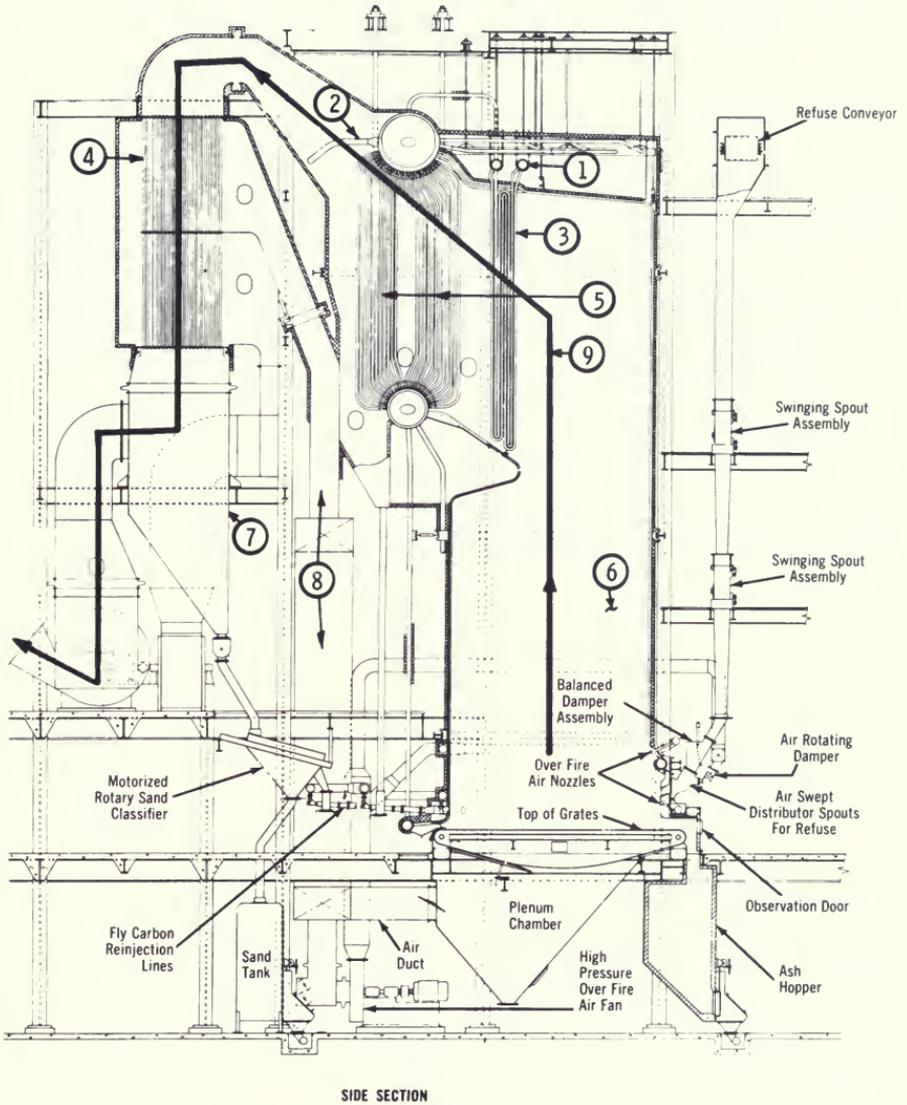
Components of a typical large steam generator equipped with a spreader stoker. (Drawing from Detroit Stoker Company.)
